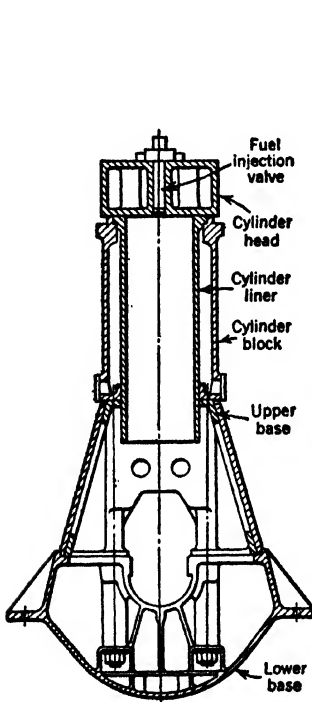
Crankcase and main frame of two-piece box girder type, for multi-cylinder Diesel engine.
